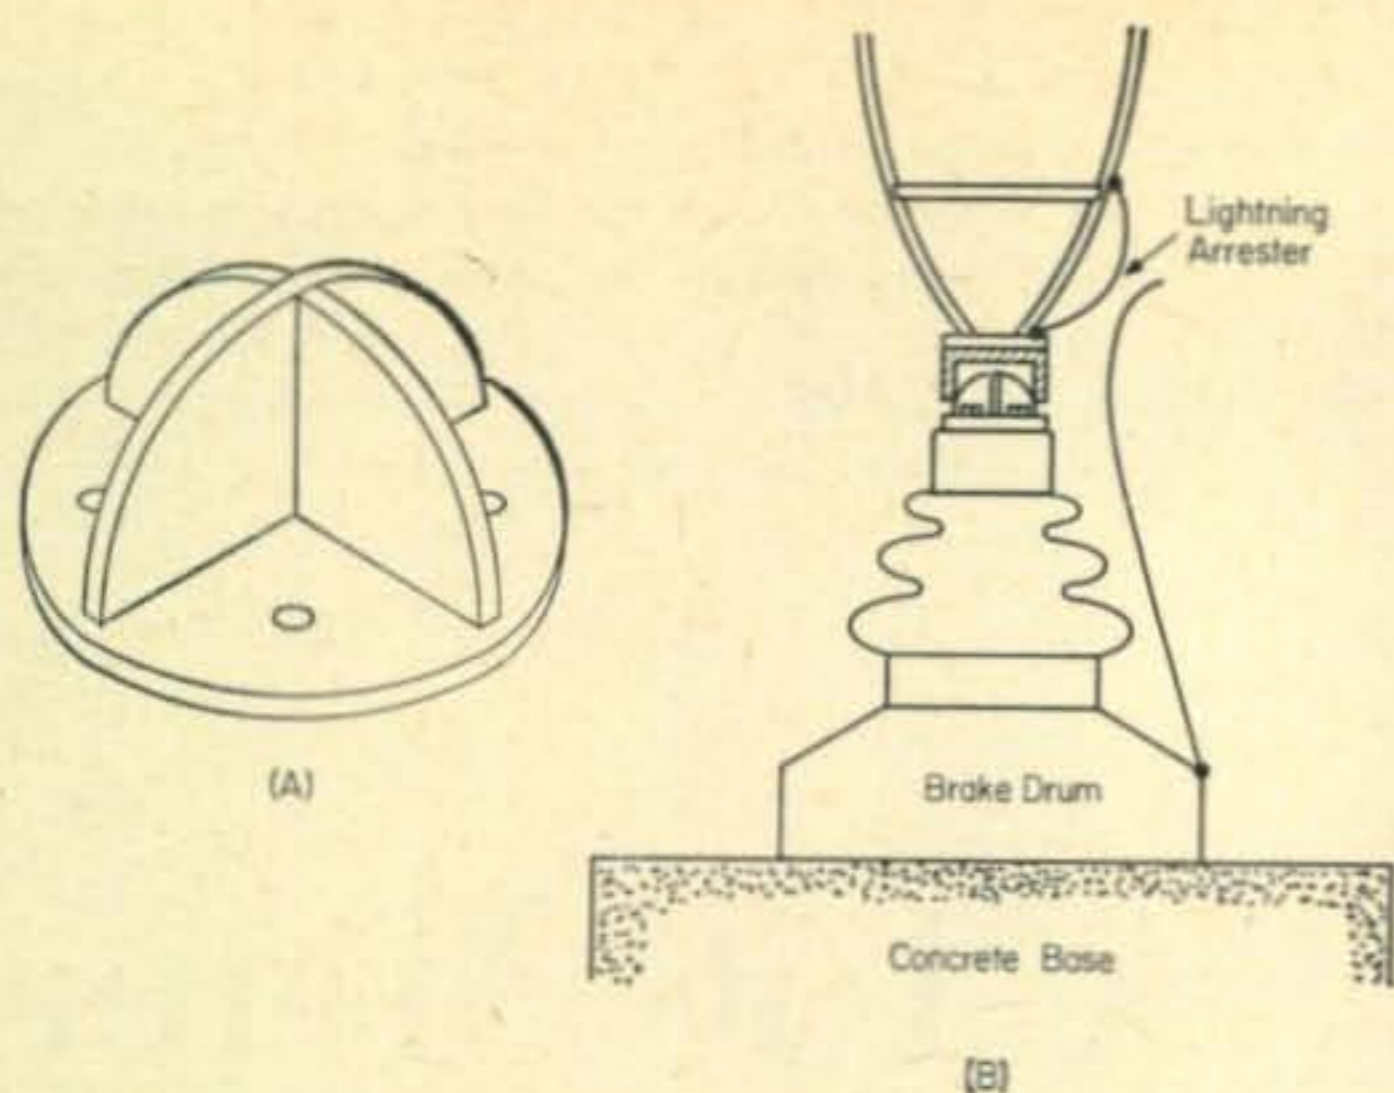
(A) Construction of the ball-joint base. Sheet steel $\frac{3}{8}$ " thick is used and the pieces are welded together as shown. (B) Lightning arrester details.
